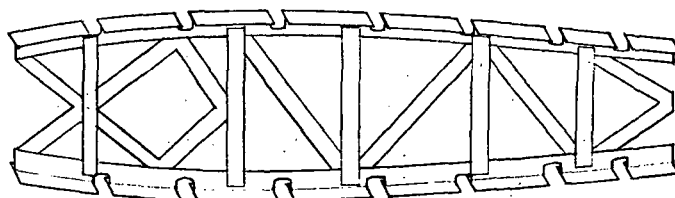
Assumed Arrangement of a Builtup Truss Type of Rib
